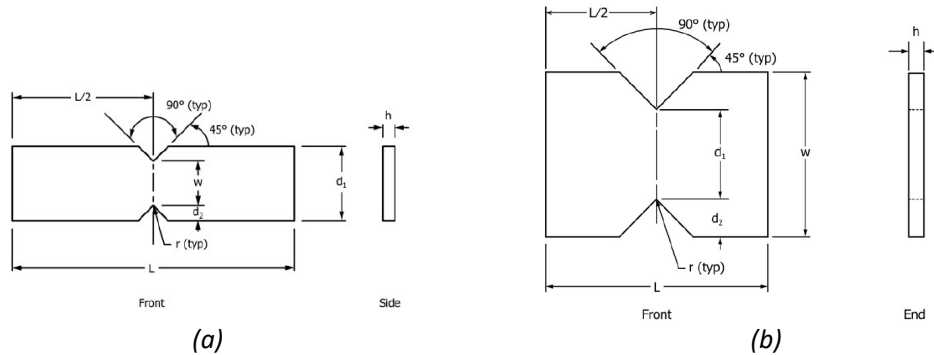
Labelled diagram of (a) ASTM D5379 test specimen [1] and (b) ASTM D7078 test specimen [2].
